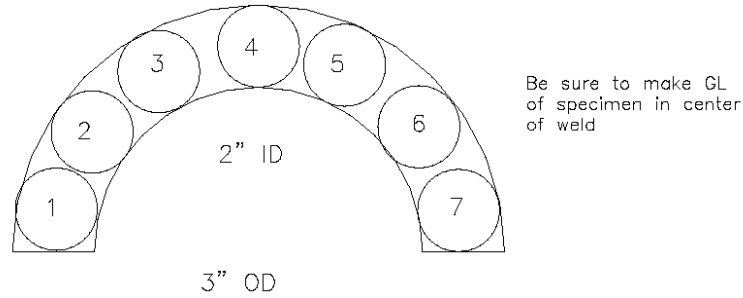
Typical Weld Metal and Weldment Specimen Cutting
